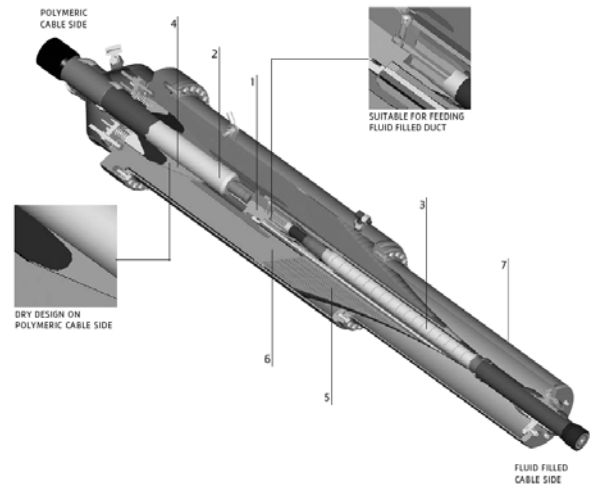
150 kV transition joint, 1-conductor connection, 2-extruded cable, 3-fluid filled cable, 4-rubber stress cone, 5-paper stress cone, 6-epoxy resin bushing, 7-steel outer casing.
